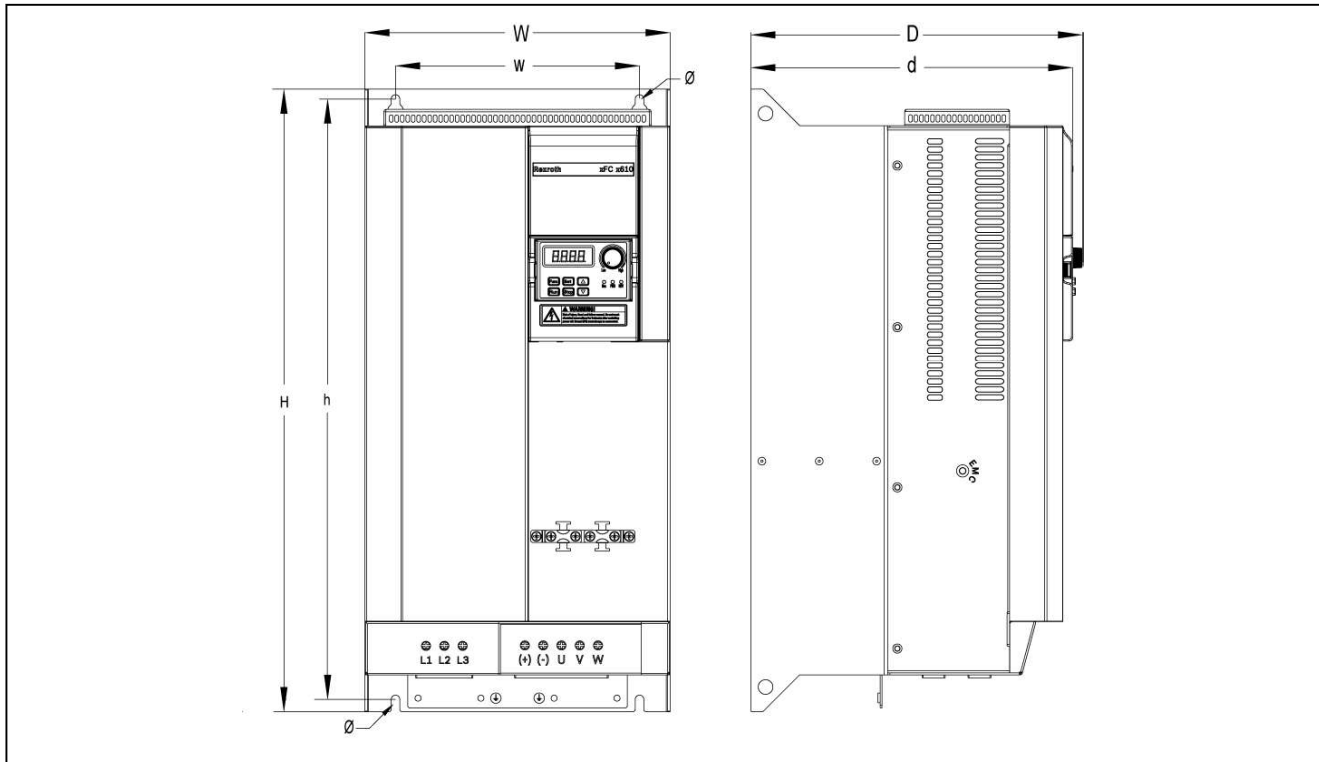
VFC 5610 30K0...37K0 dimensions figure
